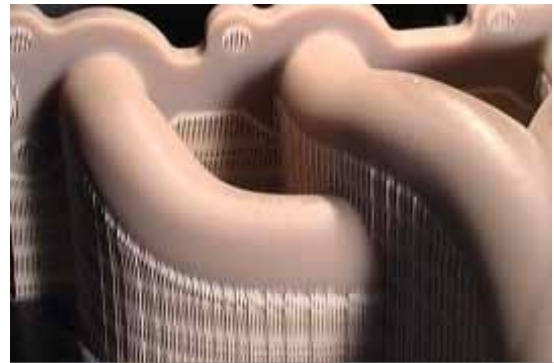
Rapid Casting pattern 3D Printed in investment casting wax using a 3D Systems Thermojet modelling system
